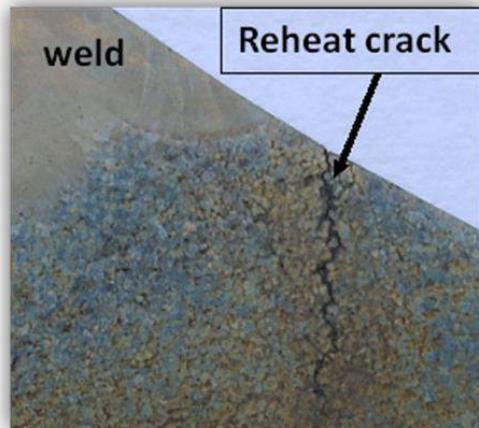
Reheat crack near a weld in 316H stainless steel.
